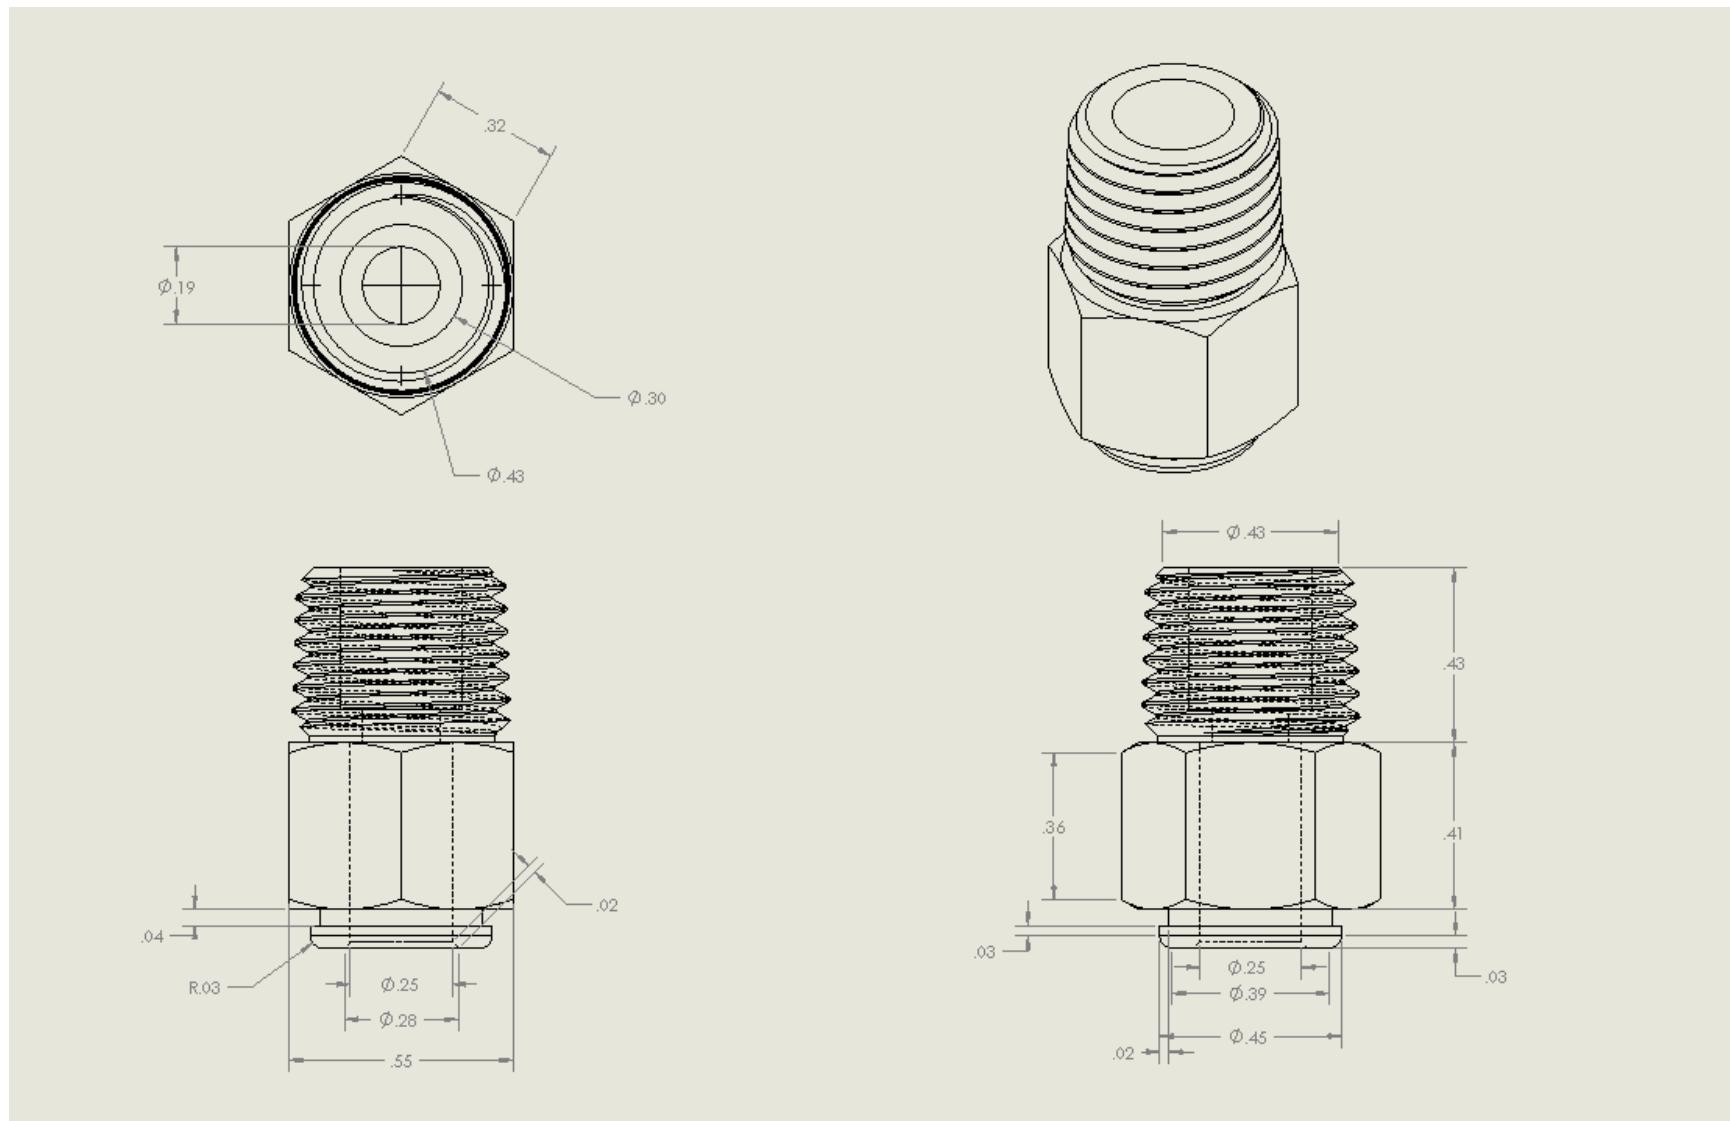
Part 1025 (Push-to-Connect Tube Fitting for Air, Adapter, for $\frac{1}{4}$ " Tube OD, $\frac{1}{4}$ NPT Male) Part Drawing
